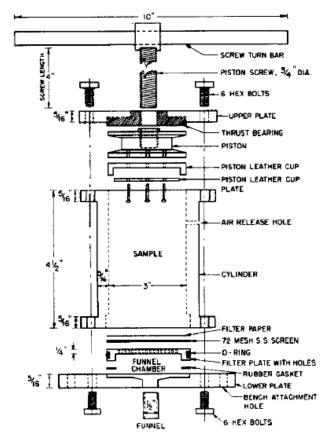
Exploded drawing of sediment squeezer. Siever (1961)
